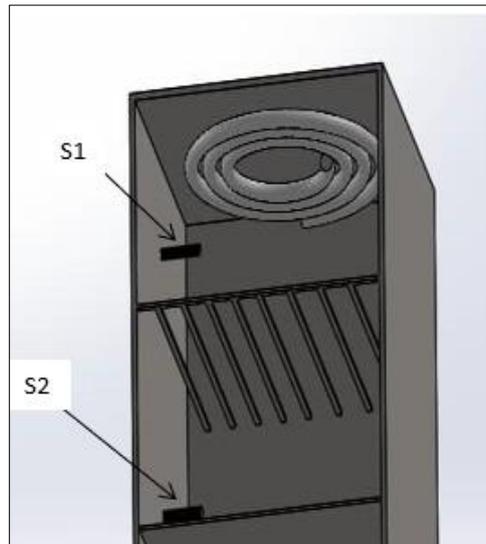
Exploded view of the dryer showing the sensors (S1 and S2)
